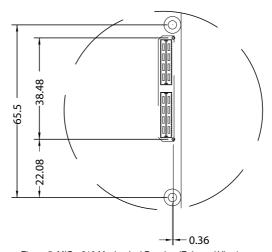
MIOe-210 Mechanical Drawing (Enlarged View)
